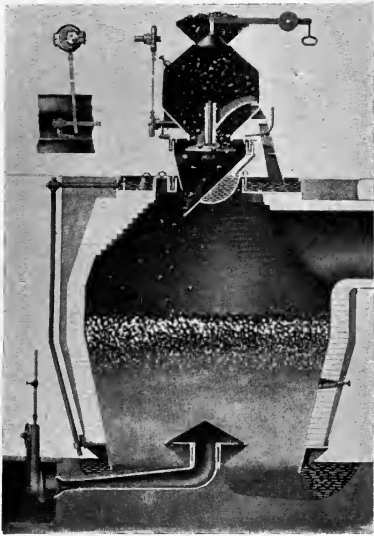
Sectional view of continuous gas producer equipped with automatic feed
